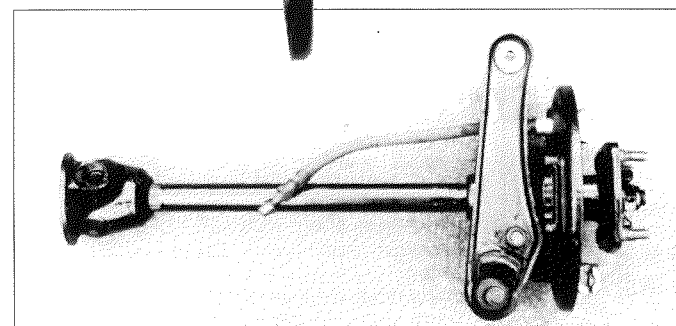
The completed unit with new U.J. and nylon trunnion bushes. With the assembly back on the car and the brakes bled you will have completed one of the more difficult DIY tasks on the car. Well done!
